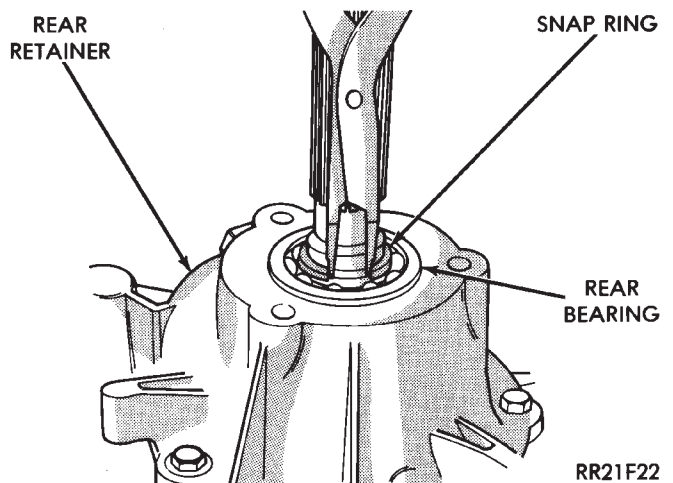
Installing Mainshaft Rear Bearing In Rear Retainer
